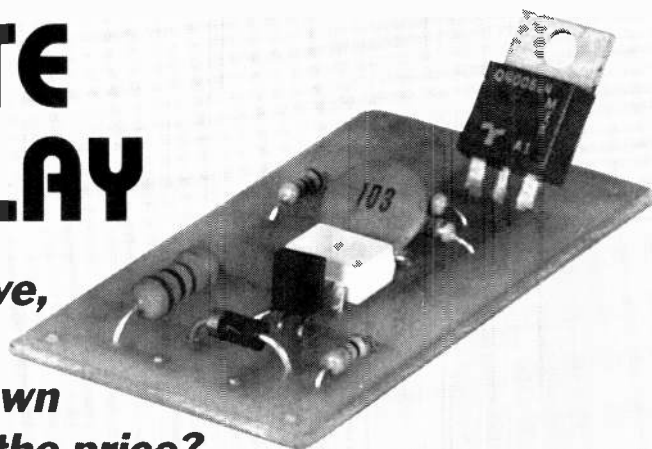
THE CURRENT VERSION of the PC board, shown here with all parts installed.
